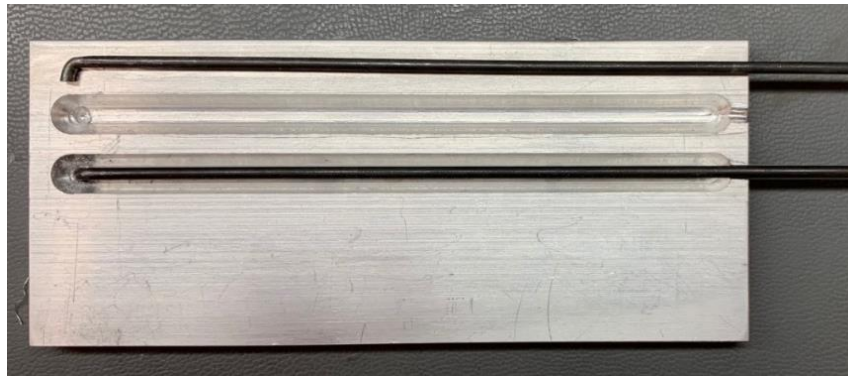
A simple machined aluminum mold and two steel lumen-molds
